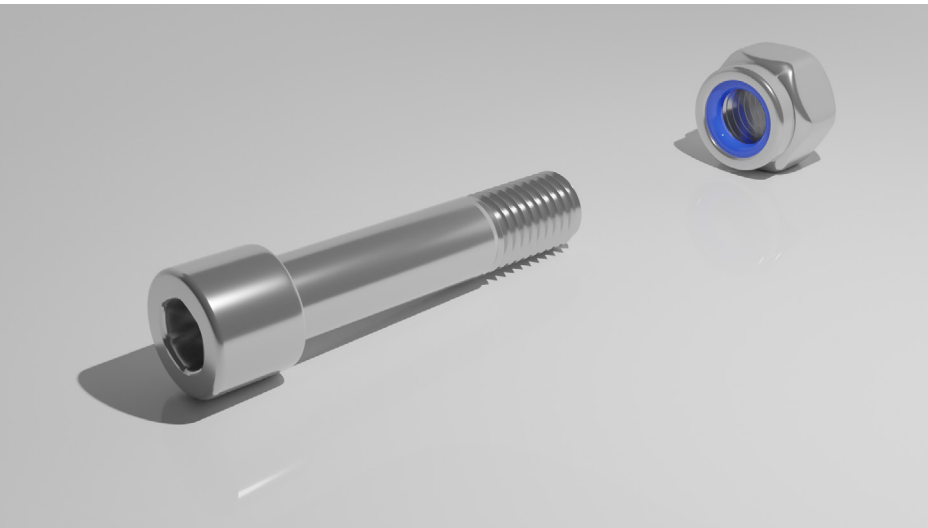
M1.4 bolt and locknut (embedded in module housing)
